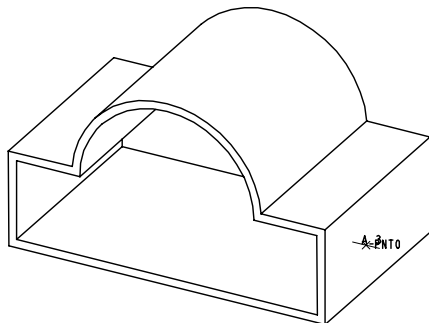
Datum axis passing through the datum point and normal to the plane
